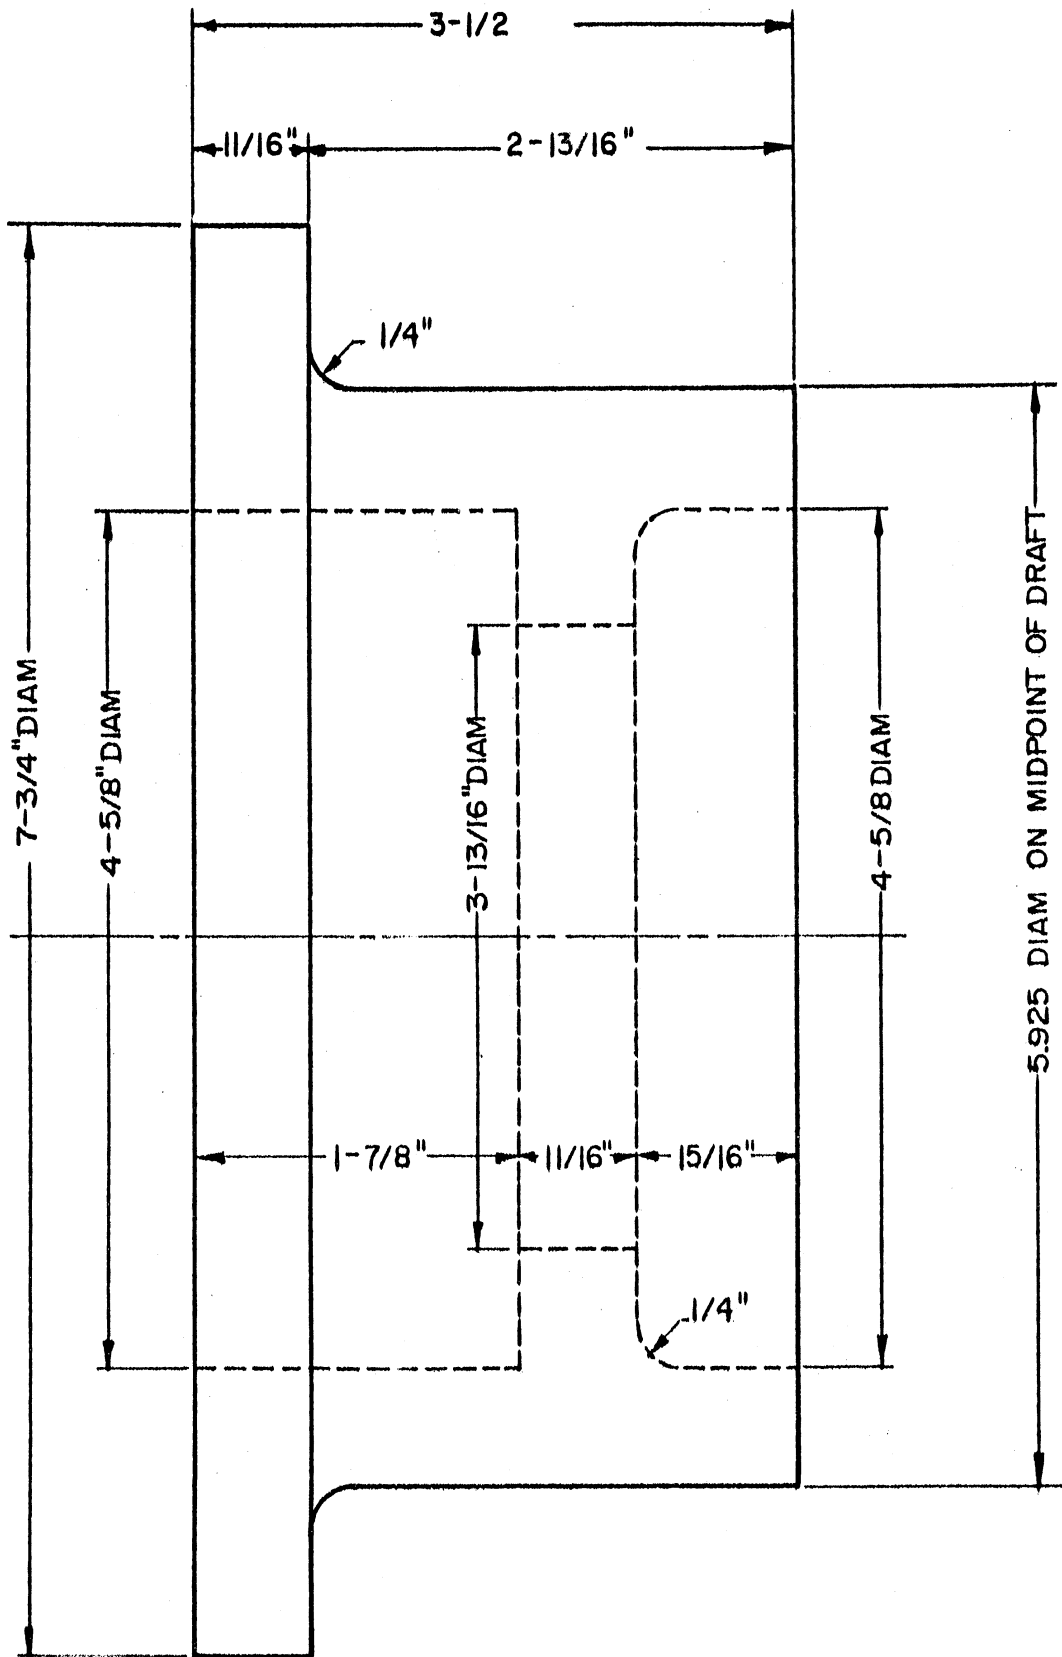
Casting used in turning tests. Material: Eaton Permanent Mold Iron.
